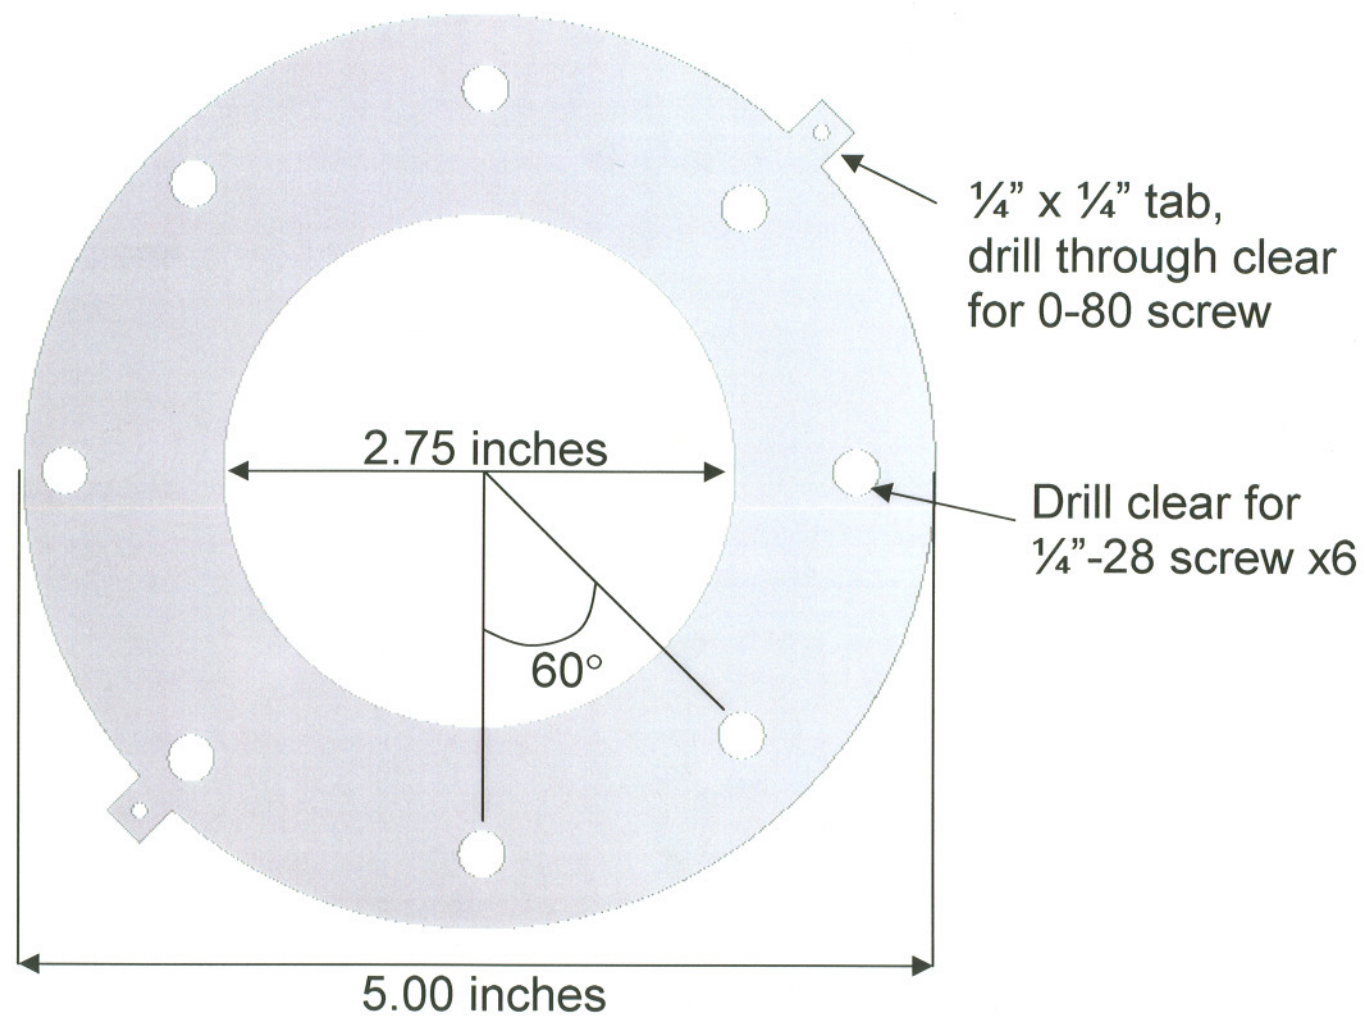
MasterCam design drawing of first curved drift tube spacer.
